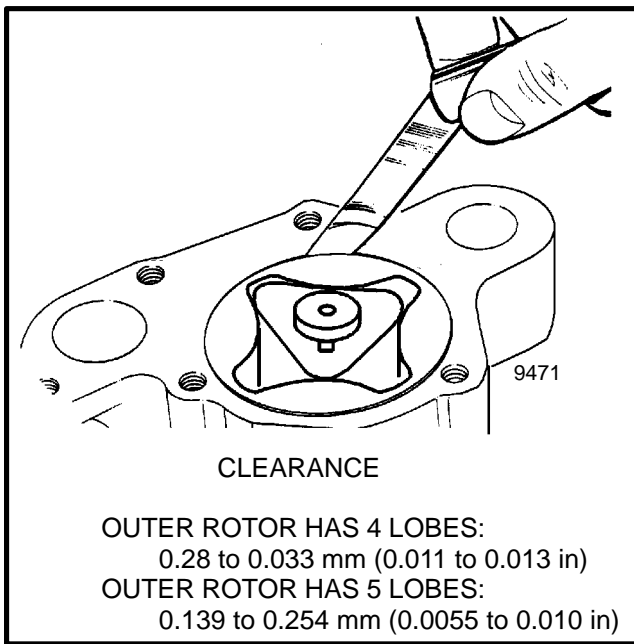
CHECK THE CLEARANCE BETWEEN ROTOR AND BODY
